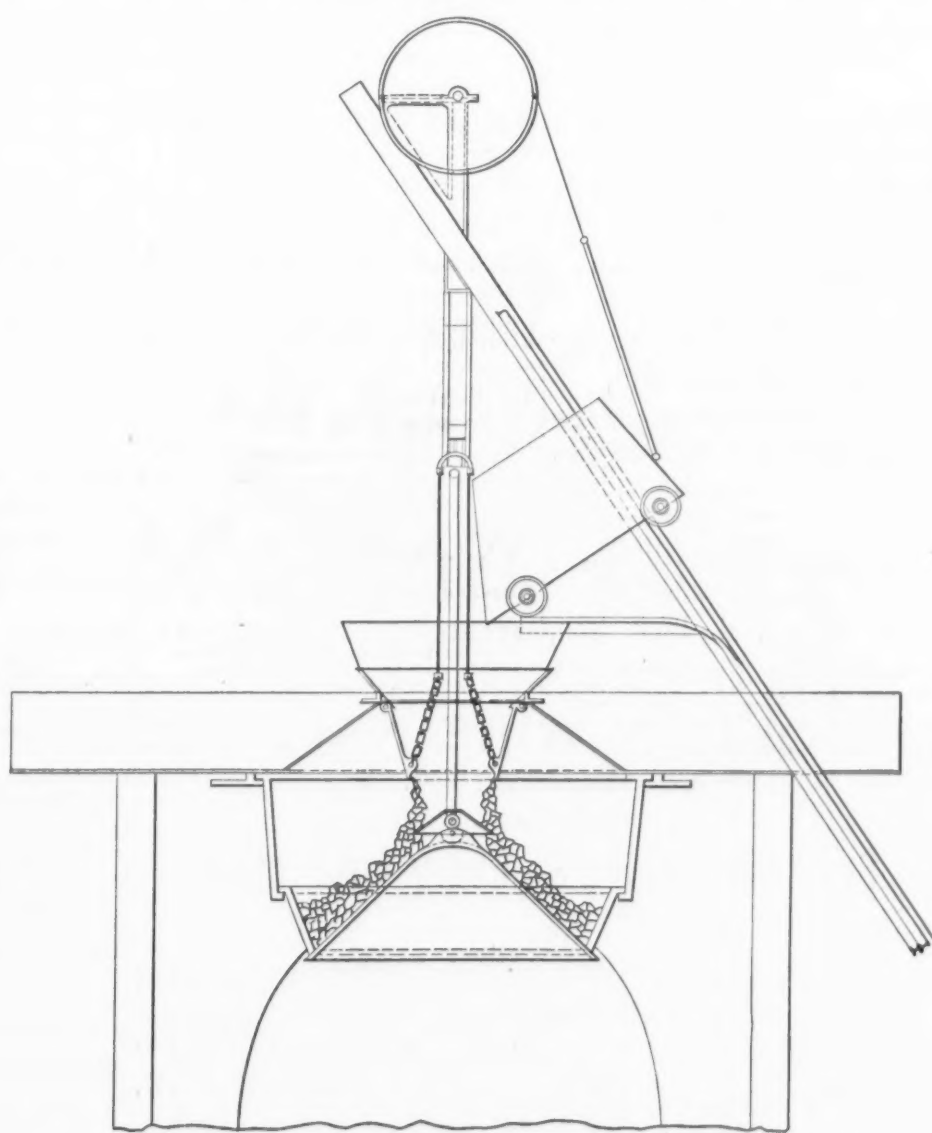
Side Elevation of Furnace Top, Showing Part of Inclined Furnace Hoist.
